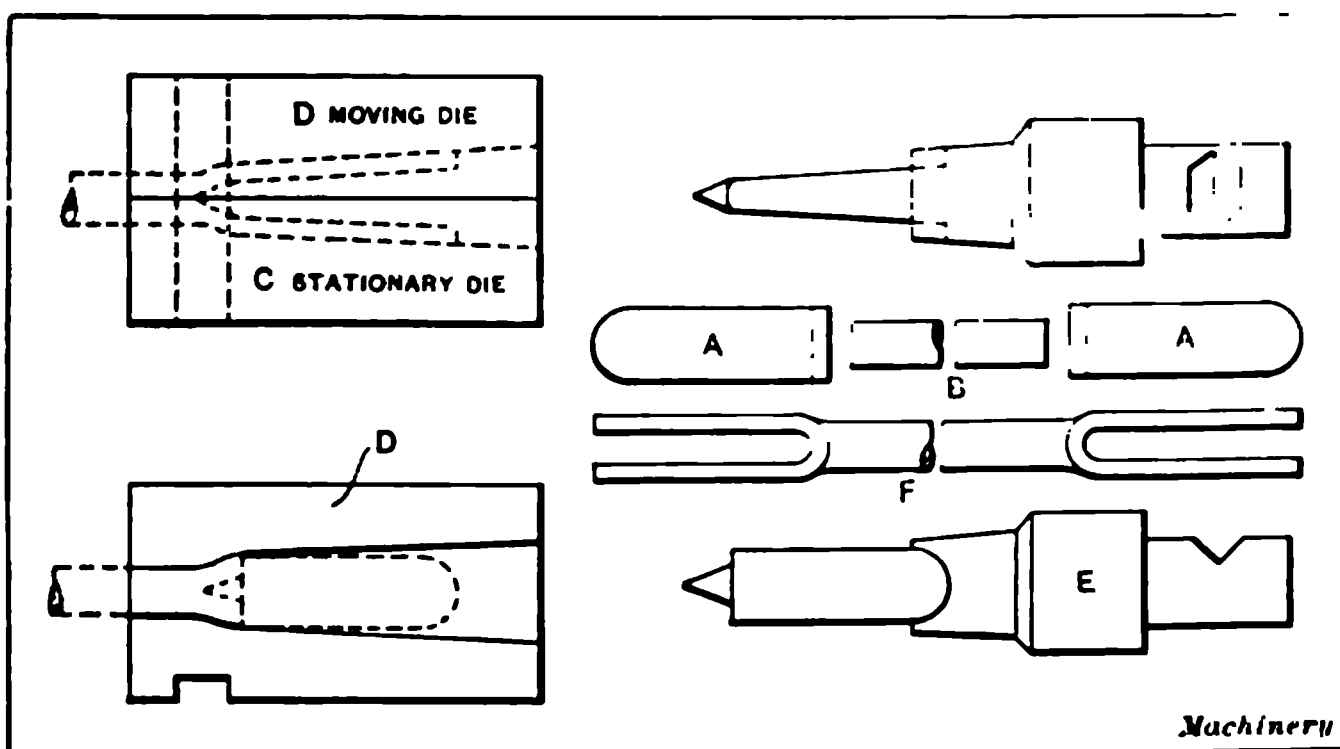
Illustrations showing Sequence of Operations in the Butt-welding of Bottom Connecting-rods
